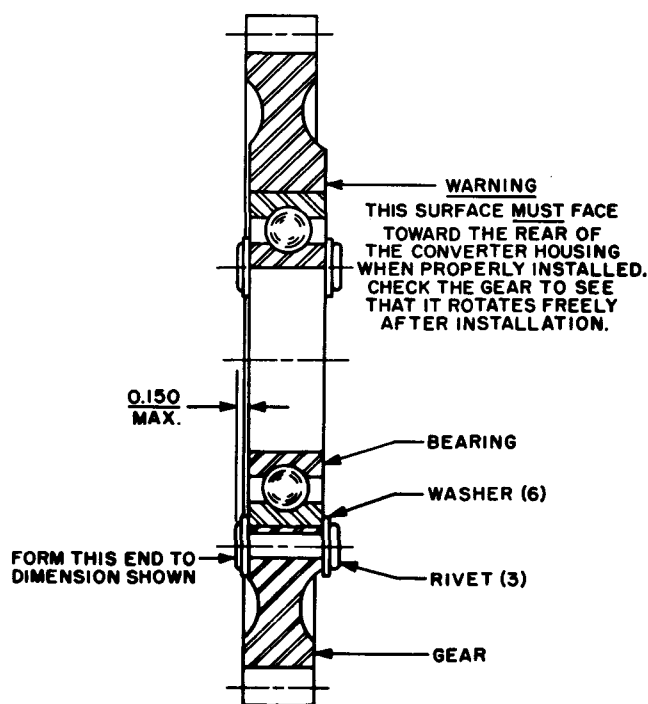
Accessory drive idler gear assembly and installation—cross section
